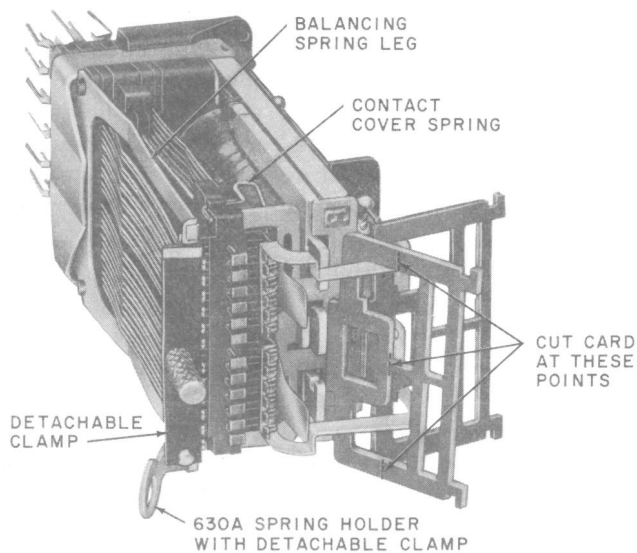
AL-Type Relay—Card Removable Tools Mounted in Place With Detachable Clamp on 630A Spring Holder
